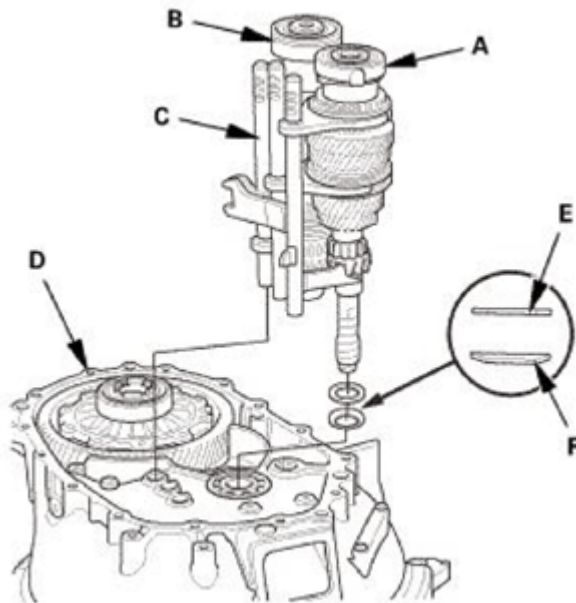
Identifying Mainshaft, Countershaft, Shift Fork Assembly, Clutch Housing, Spring And Washers
